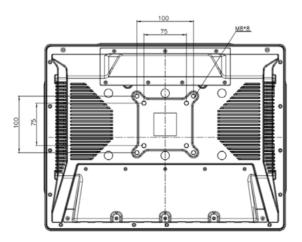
UPC-V315-QM77 Dimensions (mm)
